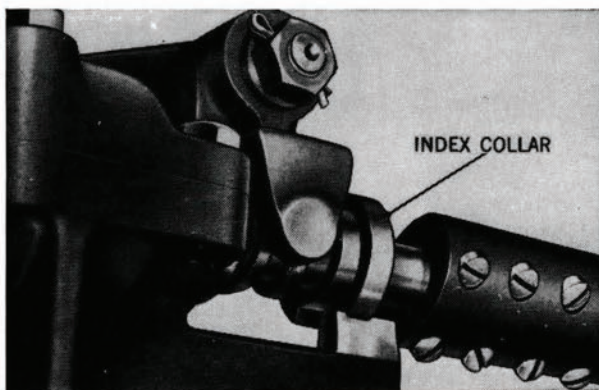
Disassembly of Cross-Over Connections for Speed Setting Mechanism.
